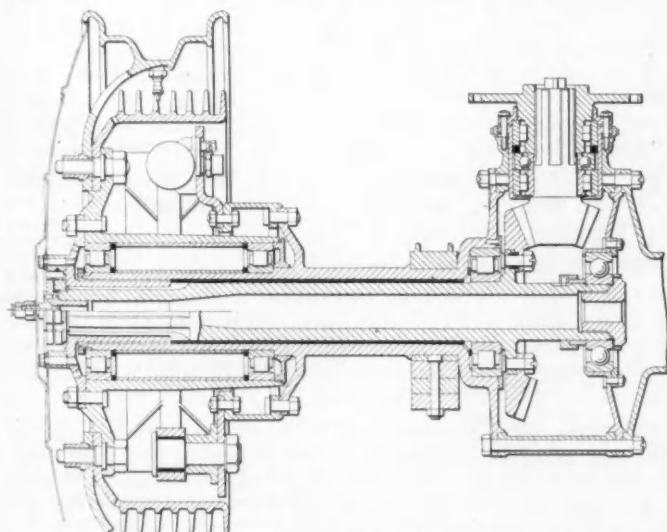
HORIZONTAL SECTION THROUGH BUILT-UP REAR AXLE, DIFFERENTIAL AND WHEEL HUB
